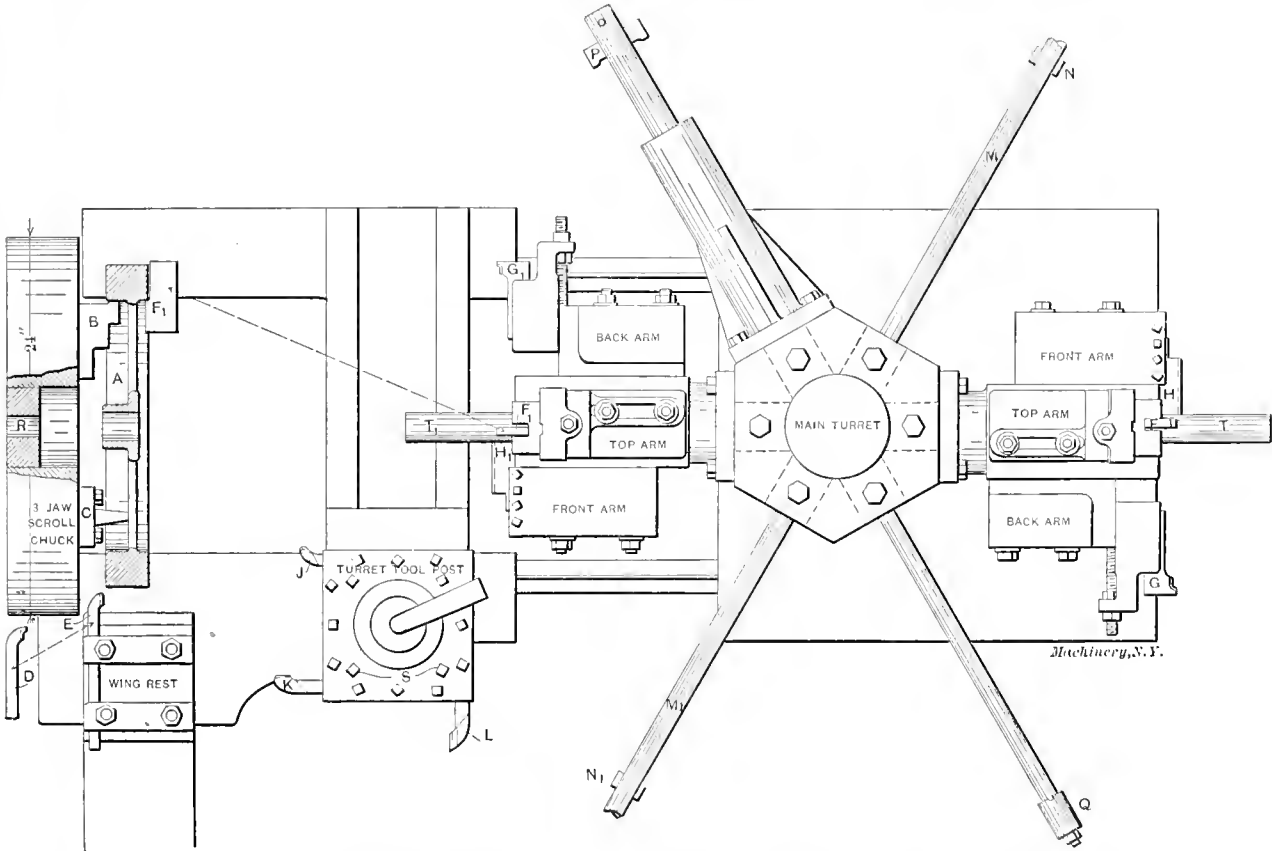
Arrangement of Machine and Tools for Finishing a Fly-wheel Complete at One Operation.
